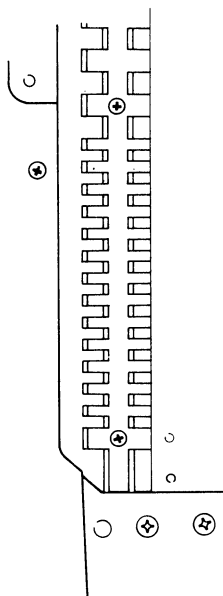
Engine Access Door Closing (Sheet 2 of 5)
